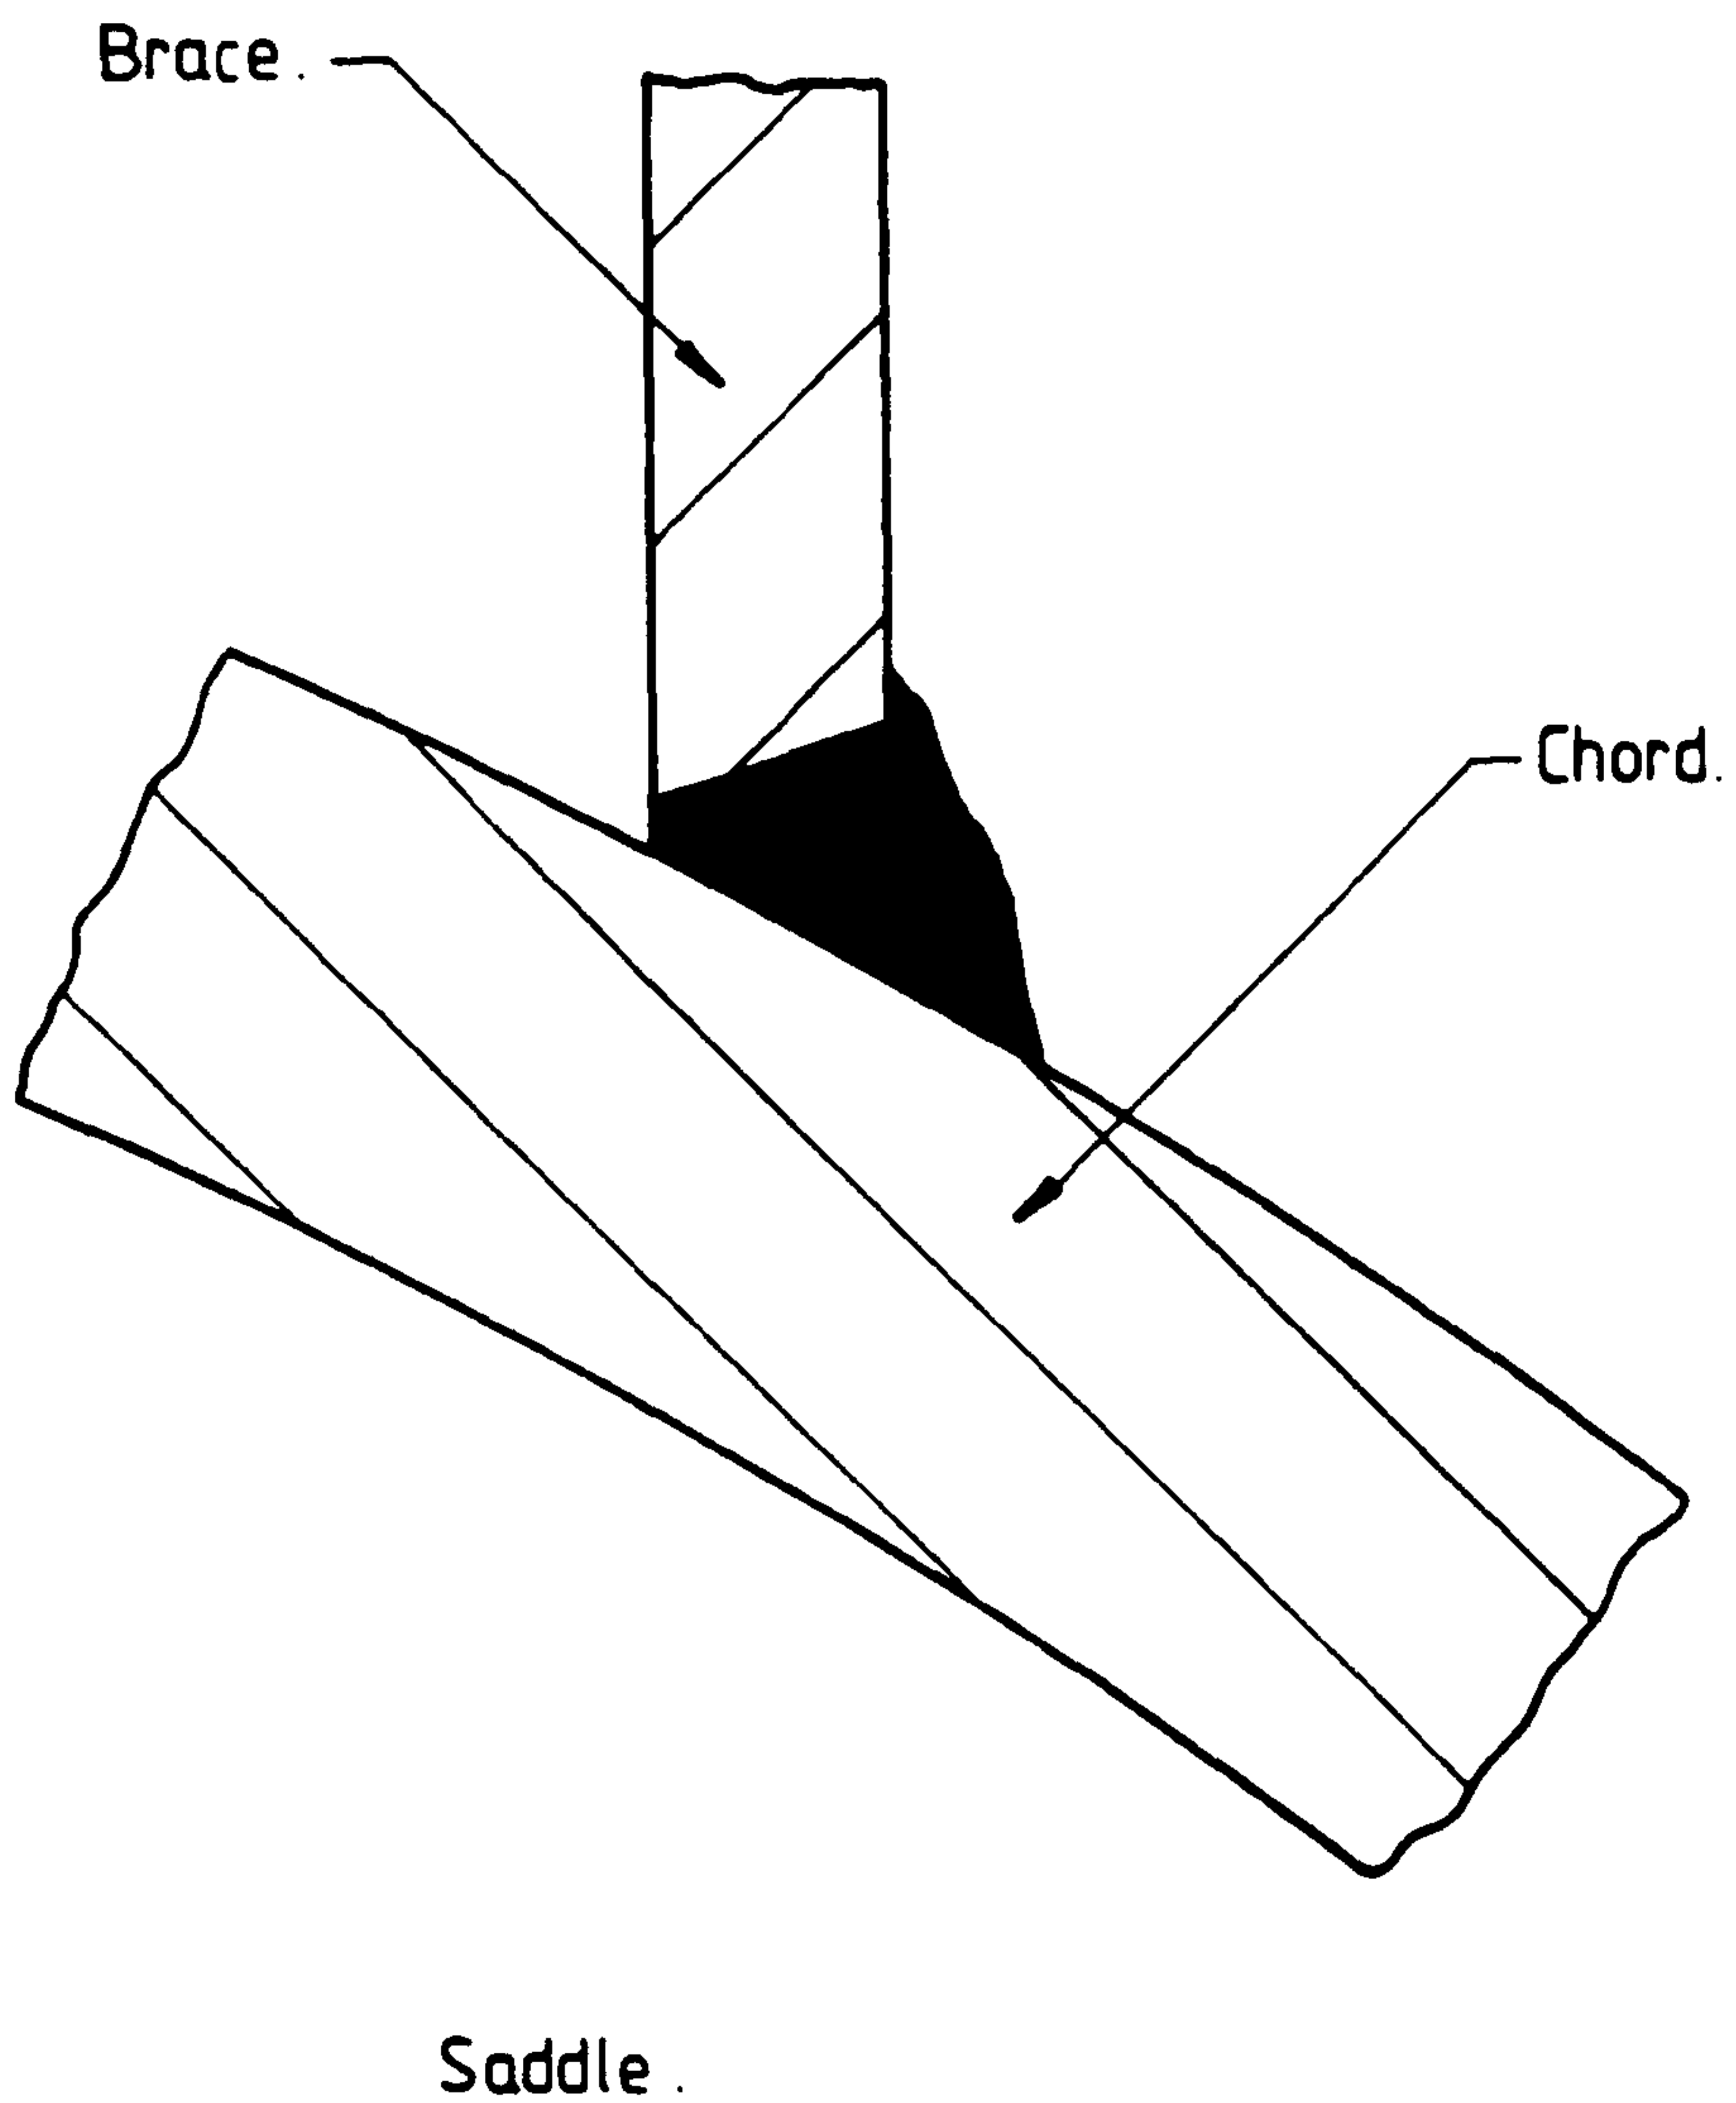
Schematic of a sharp weld toe/base metal intersection - Dutch joint (c.f. figure 1.15)
